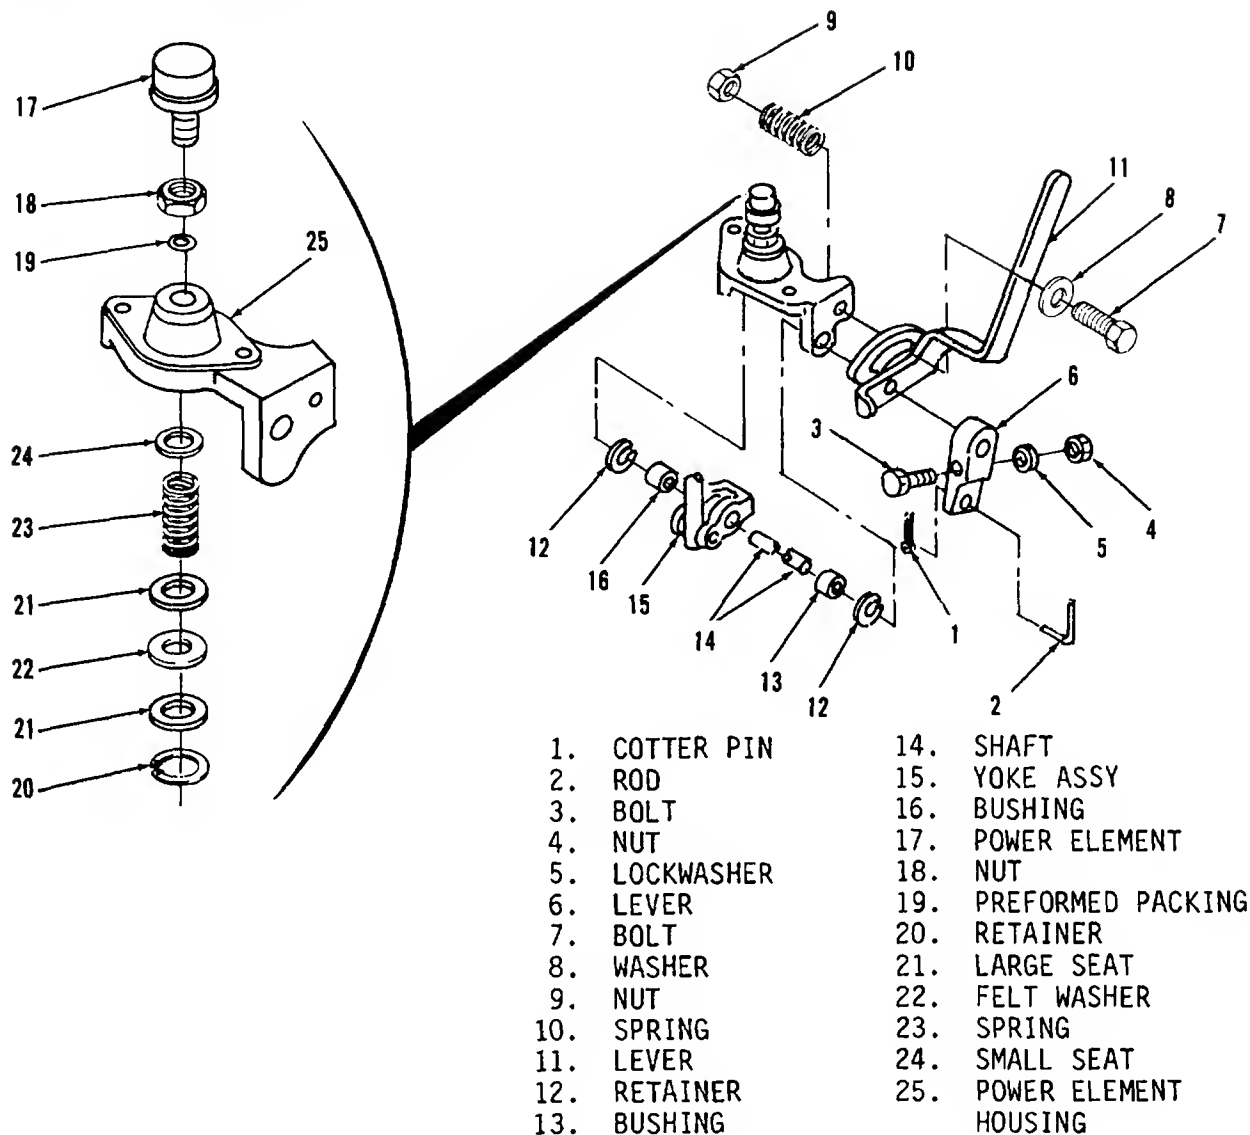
Shutter Thermostat Assembly, Exploded View
